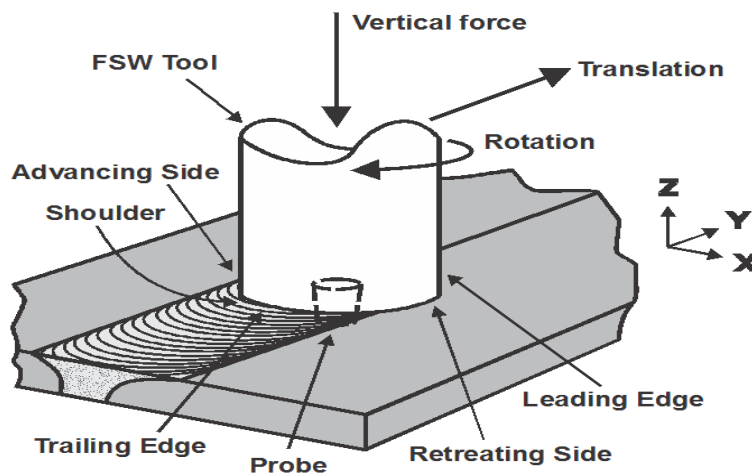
Schematic Illustration of Friction Stir Welding Process
